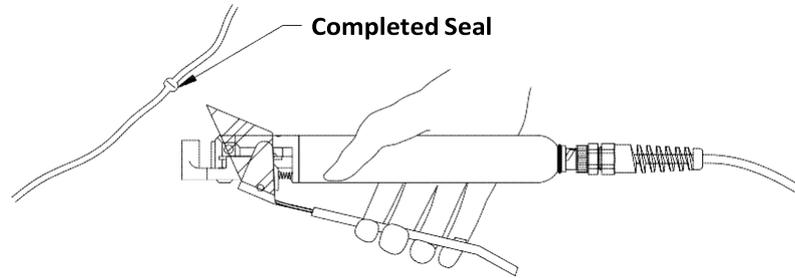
, Releasing the Sealing Head Lever at Seal Completion
